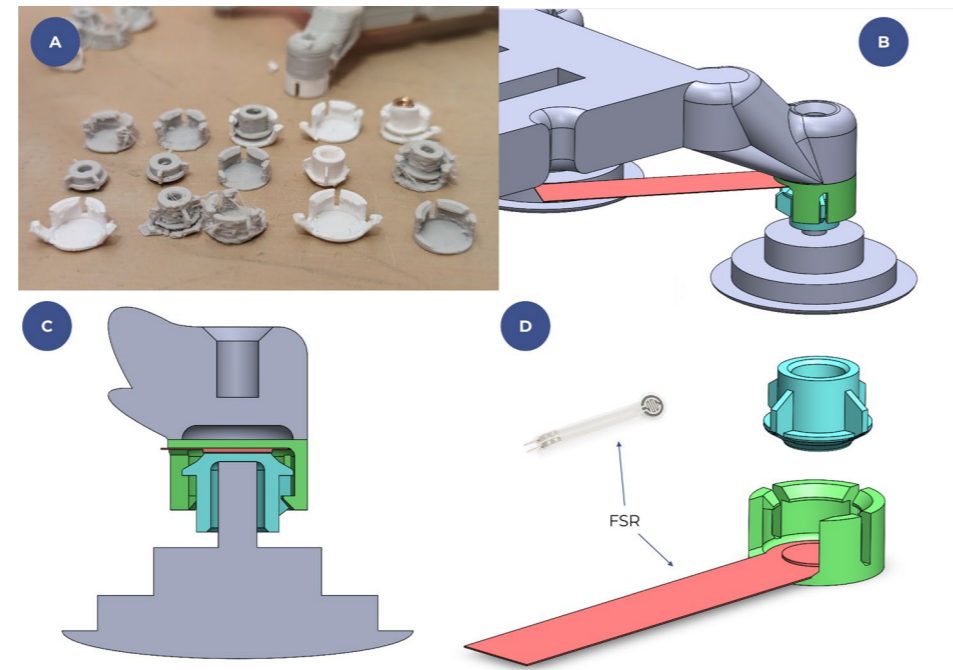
A. shows iterations of prototypes for the FSR assembly, B. shows how the FSR assembly is mounted to the rest of the test platform, C. shows a section view and D. shows the components individually
